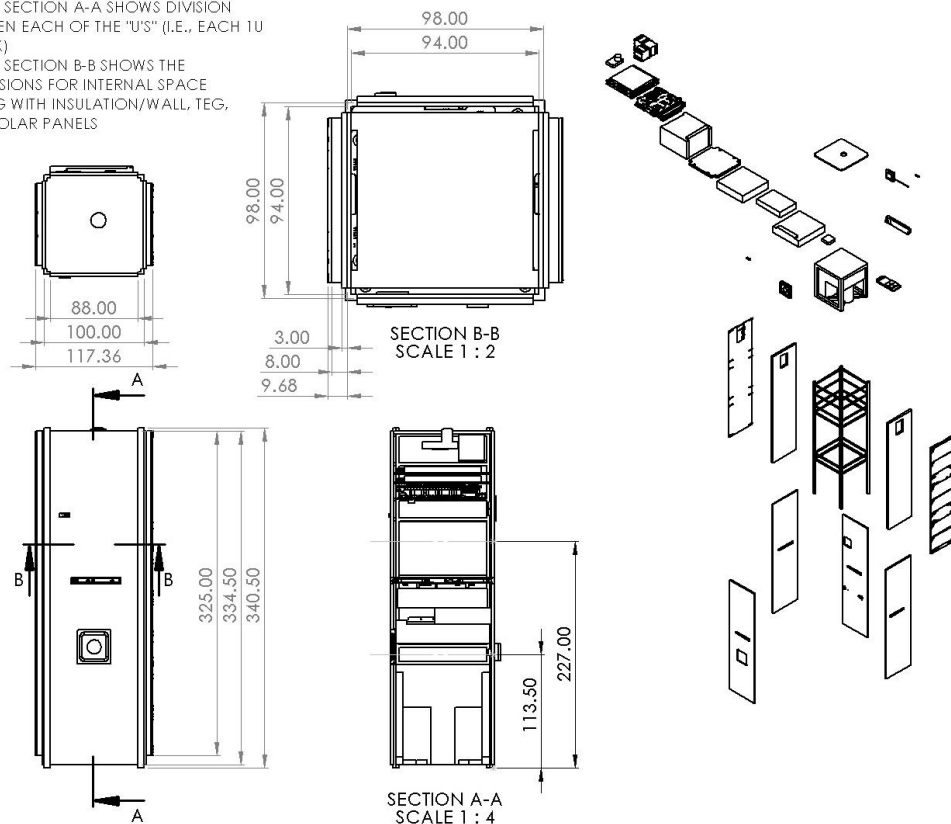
Overall Satellite Dimensions (REV 1 Layout)
